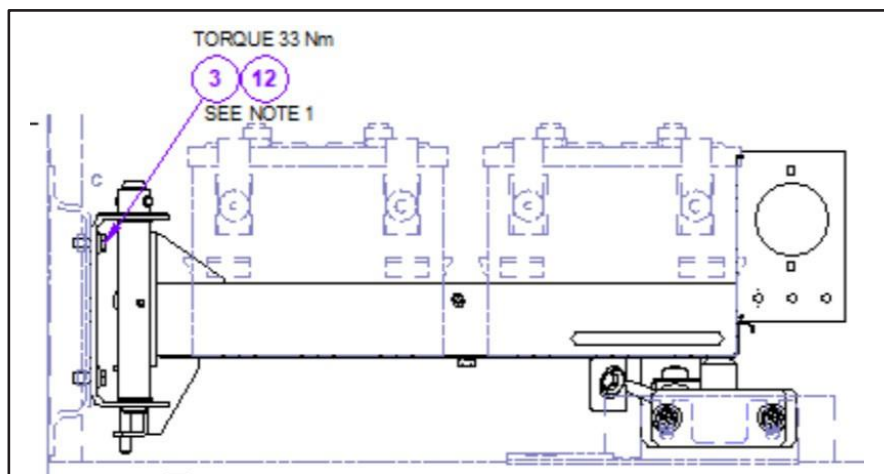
Line Diagram of Battery Tray Hinge Bolts with Torque
